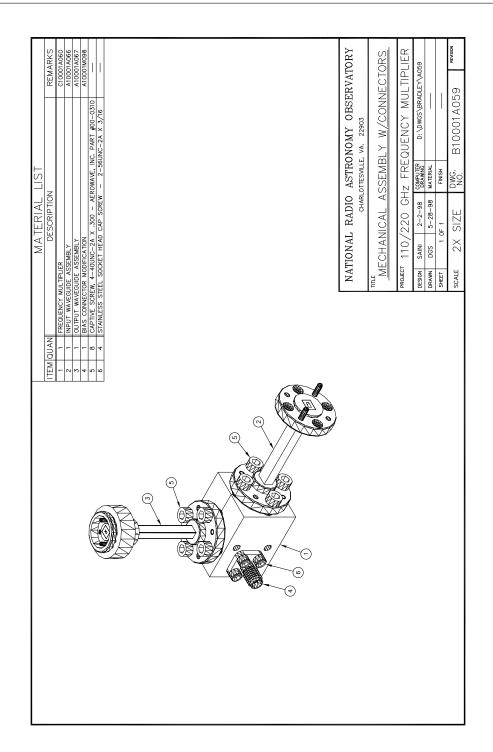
110/220 GHz frequency doubler: Mechanical assembly of the split block showing the DC bias connector and the waveguide flange adapters.
